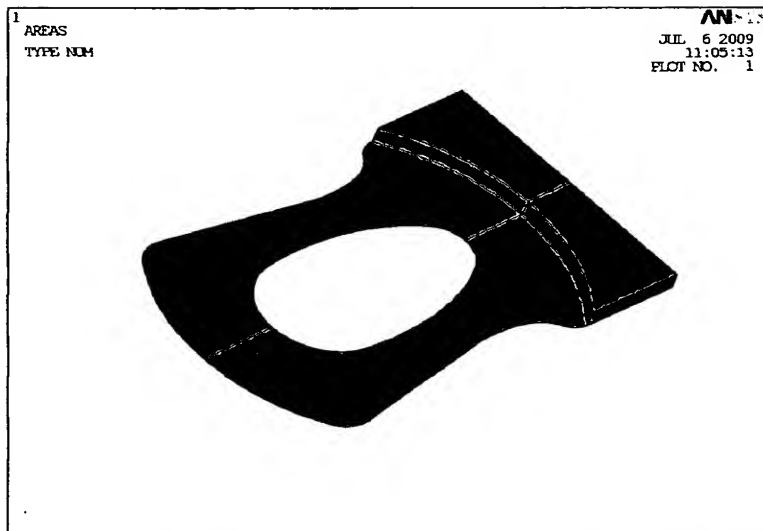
Geometry and Finite Element Mesh for Whirlpool-Embraco valve (the model has the valve and gasket parts)
